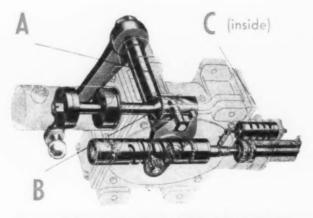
Skeleton of the recently developed hydraulic type Ross steering gear. In addition to other components photo shows A, B and C described in text.
